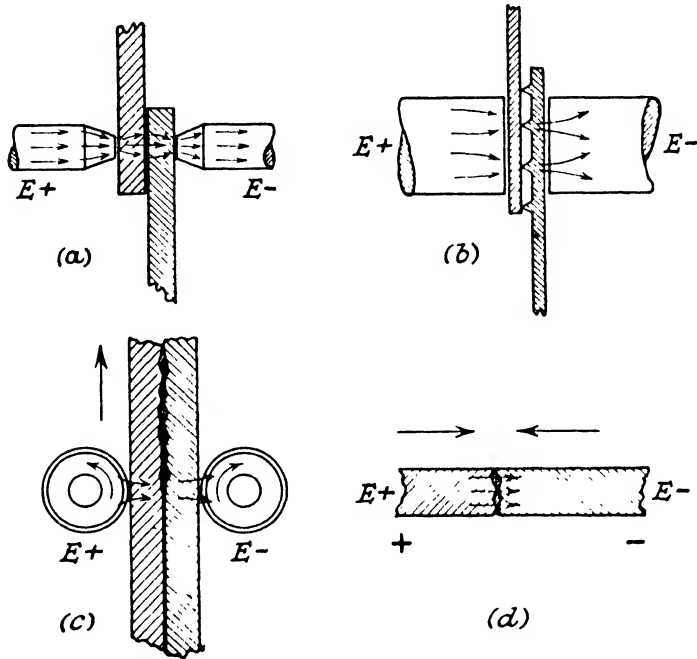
A.—(Small arrows indicate lines of current flow.) (a) *Spot welding*. Converging electrodes produce concentration of current with intense local heating and fusion at selected point in overlapping material. (b) *Projection welding*. Flat electrodes held together by pressure. Fusion takes place at projecting points in overlapping material. (c) *Seam welding*. Electrodes are rollers which force the work upwards in the direction shown by the arrow. The upper portion has been welded. (d) *Flash welding*. Work forms the electrodes which are excited before being pressed in contact.
